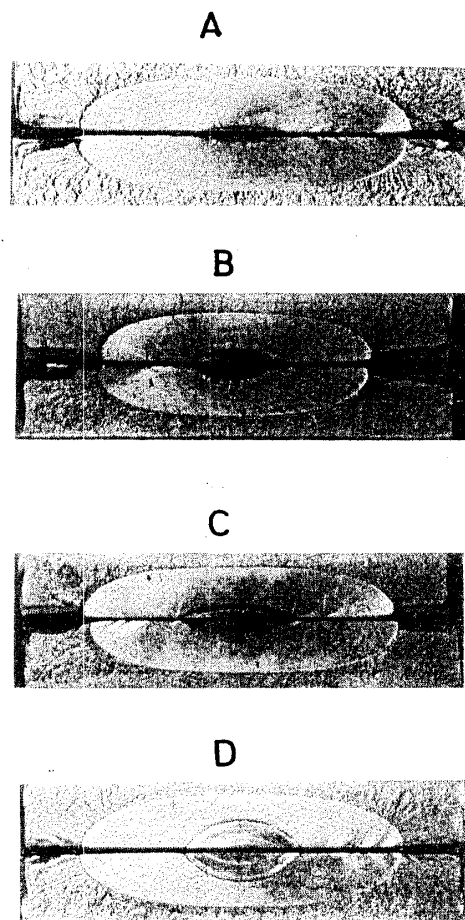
Appearance of Fatigue Crack Surface
